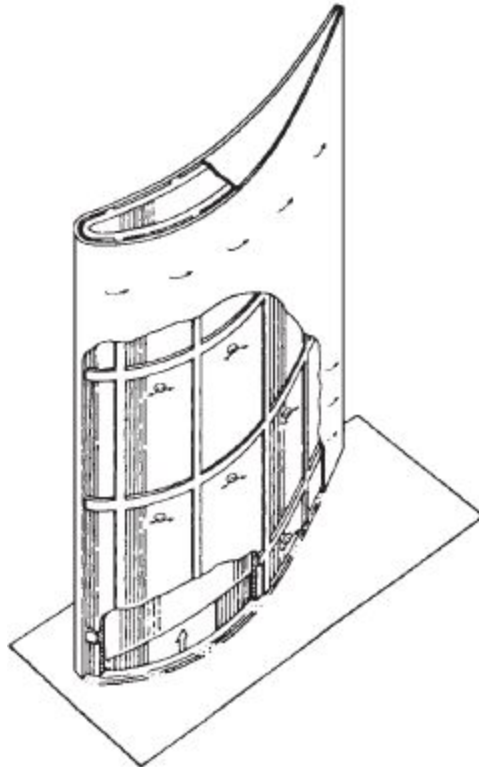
Transpiration Cooling Turbine Blade [10]
